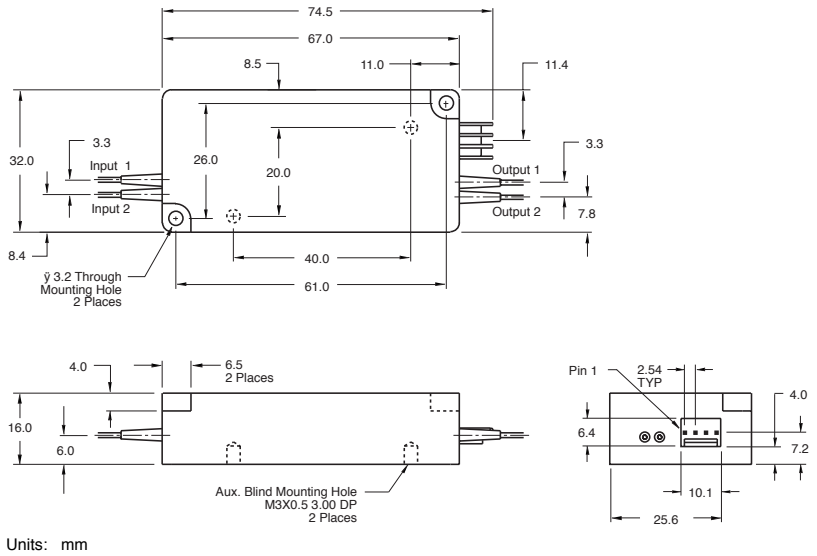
Housing Dimensions for 2x2 Prism Switch
